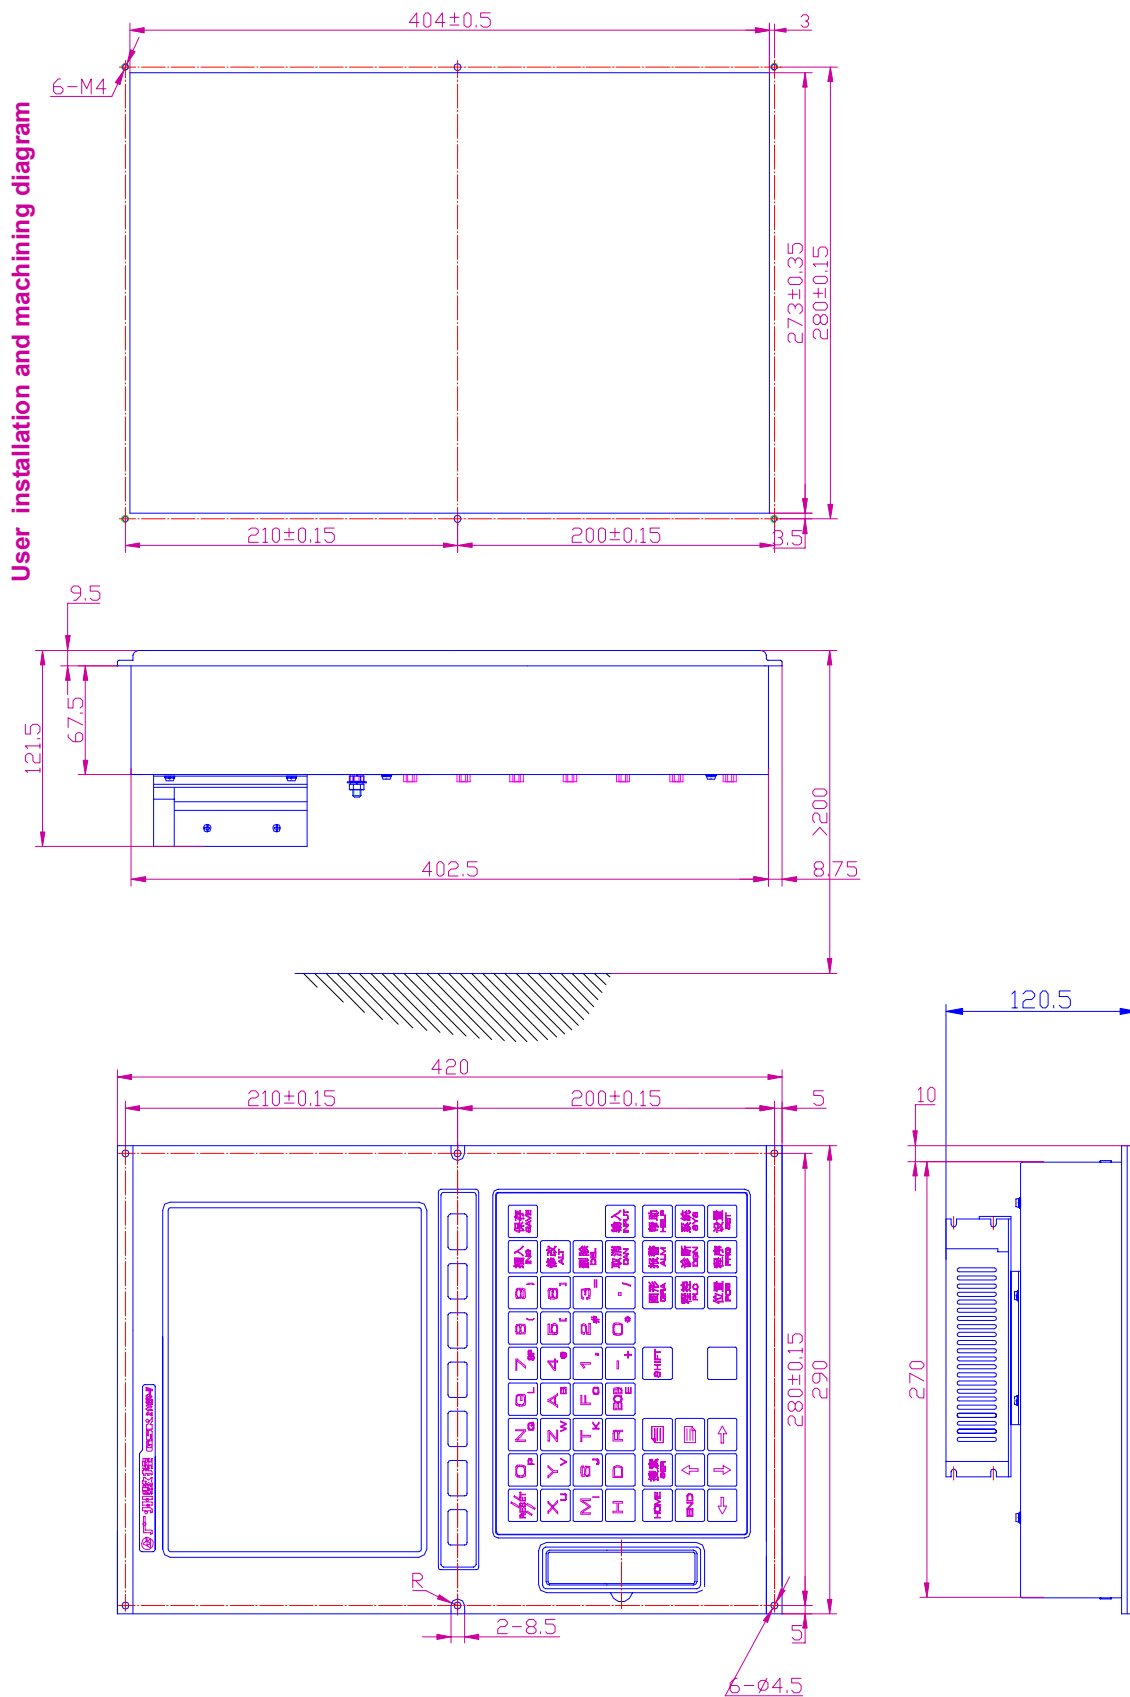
Installation dimension figure of GSK218MC-V editing panel
